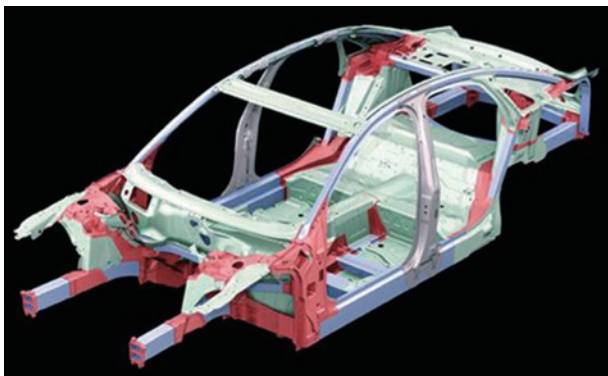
Aluminum space frames structures of AUDI A8⁵⁾.
